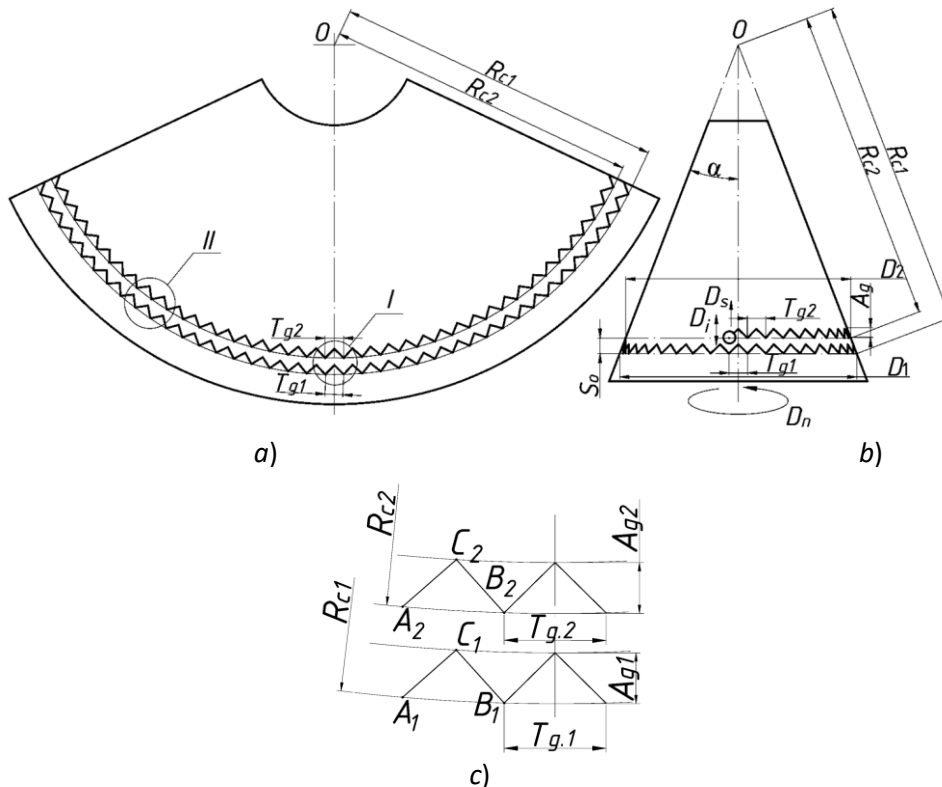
The formation scheme of a regular micro relief on a conical surface with grooves arranged in concentric circles with identical geometric parameters: (a) development of the conical surface; (b) general view of the conical surface; (c) – parameterization of the micro relief grooves.
